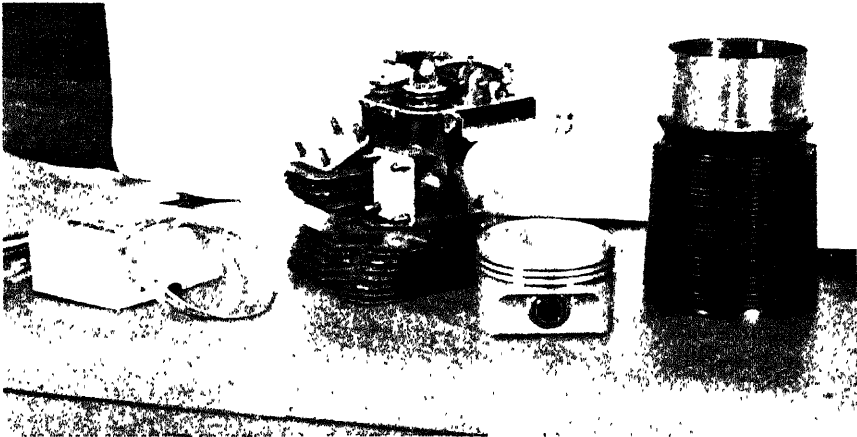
PISTON RINGS, CYLINDER-HEAD ASSEMBLY, PISTON, AND CYLINDER
